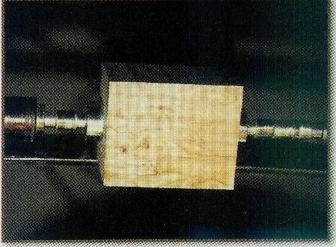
The block is mounted on a standard pen mandrell for turning. Spare bushings are used to fill out the length of the mandrell.
